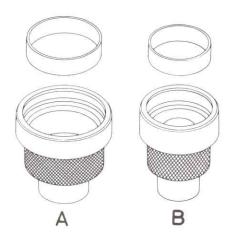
Mainshaft and differential side bearing adjusters (Sec 9)
